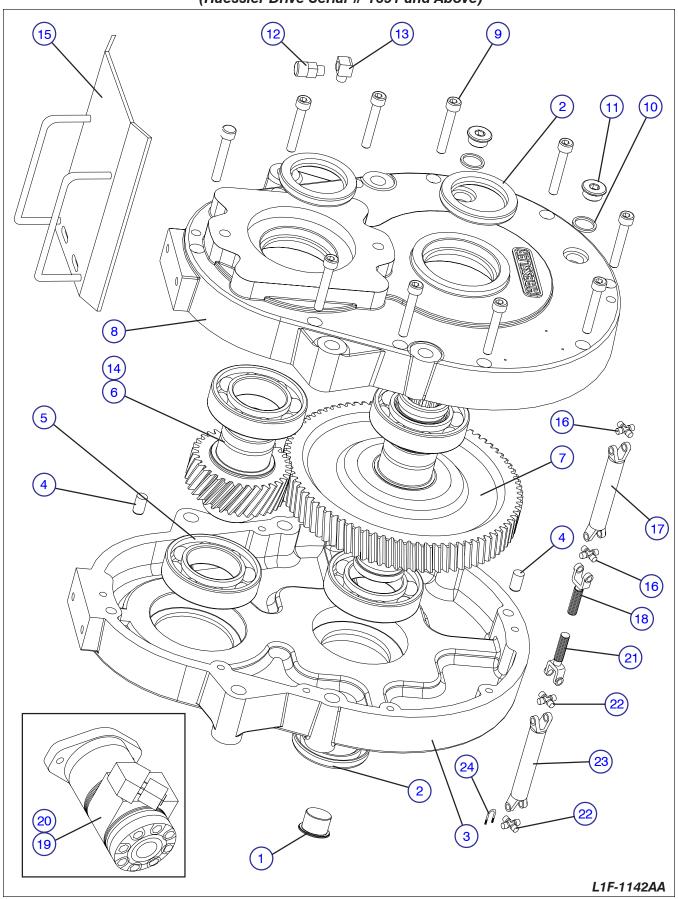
A. CENTER DRIVE AND DRIVE SHAFTS (Haessler Drive Serial # 1691 and Above)
